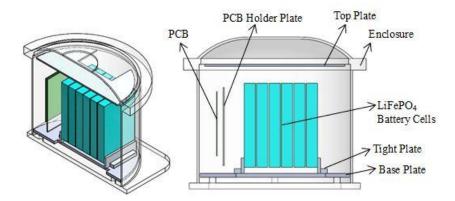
Solidworks Model (Left: Isometric View, Right: Front View)
